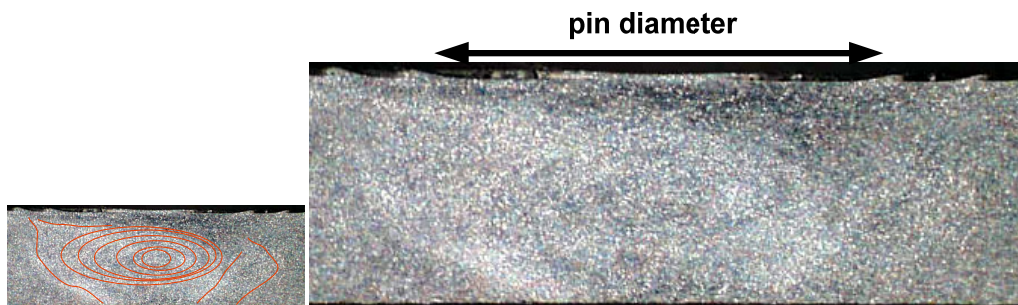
Welded nugget detail of the FS welded AA6082-T6.
